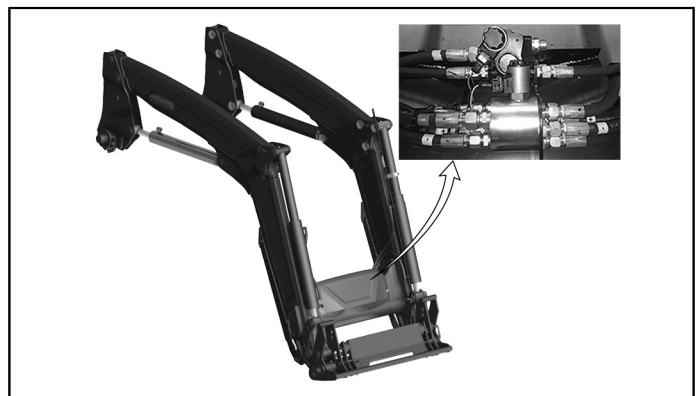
Diverting valve, Compact Valve Unit (CVU)
